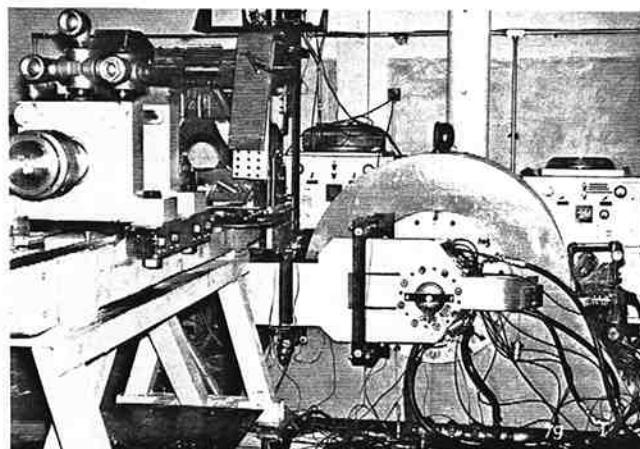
5-MJ homopolar generator with hydraulically actuated welding fixture attached
